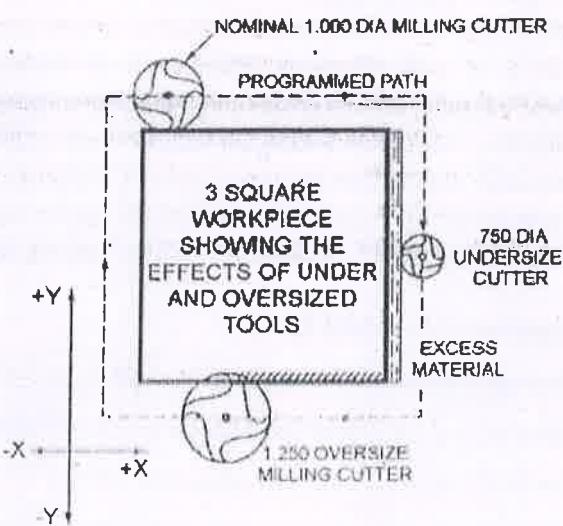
Cutter-diameter compensation must be used when machining with various size cutters.
